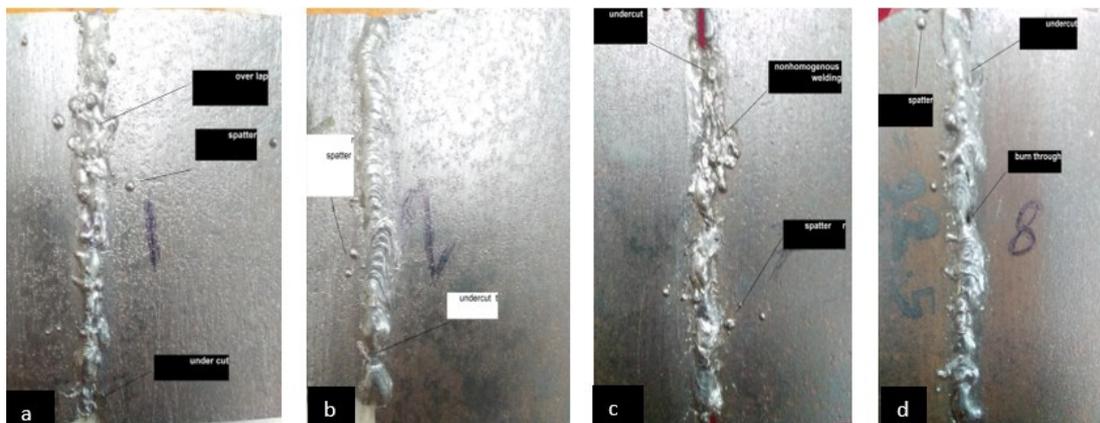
Welding defects at (a) A=250, S=112 (b) A= 250, S=118 (c) A=260, S=112 (d) A=260, S=118.
